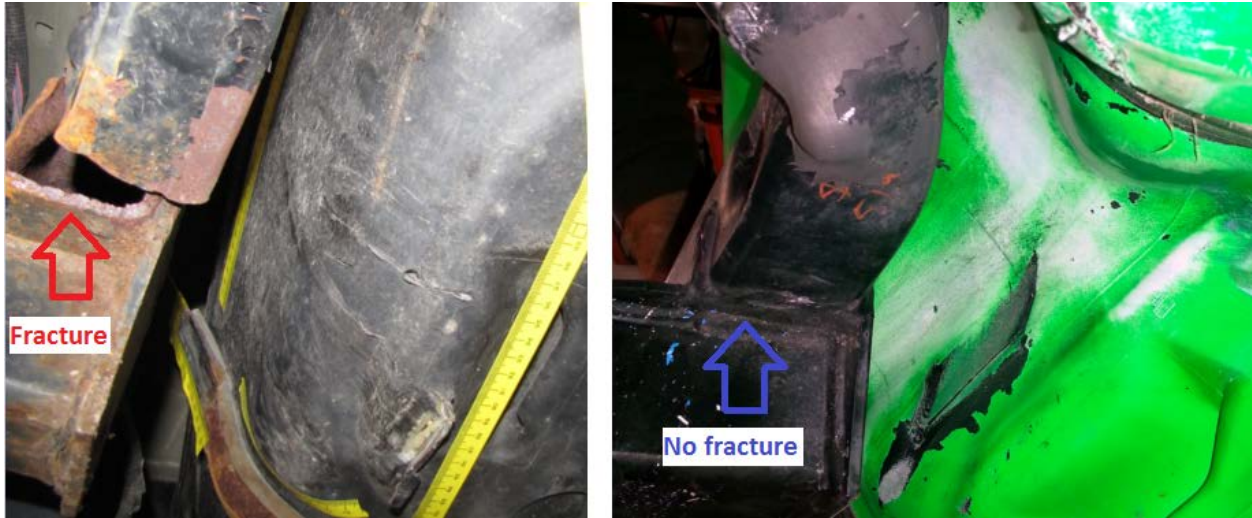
Left: Real-world crash cross-member fracture (picture taken several months after crash), Right: Reconstruction deformation, no cross-member fracture
